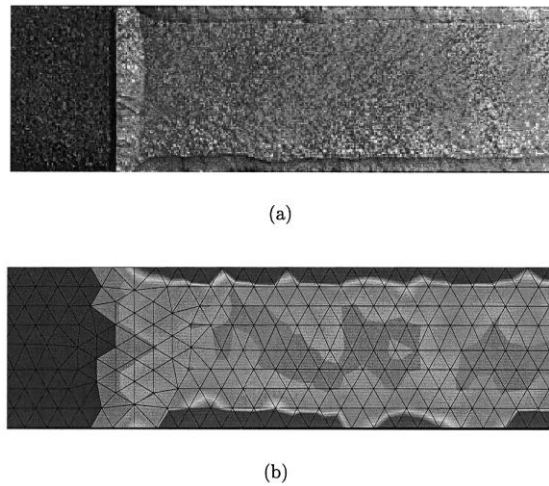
Experimental fracture surface (a) and cohesive method results (b) [125]
